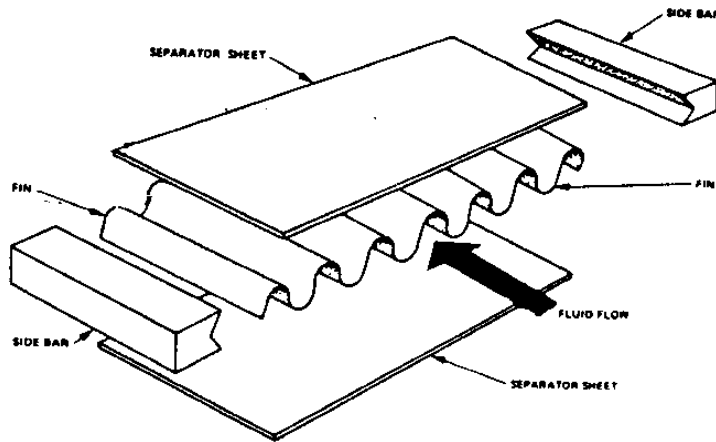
Construction details of a single element of a plated fin heat exchanger.
